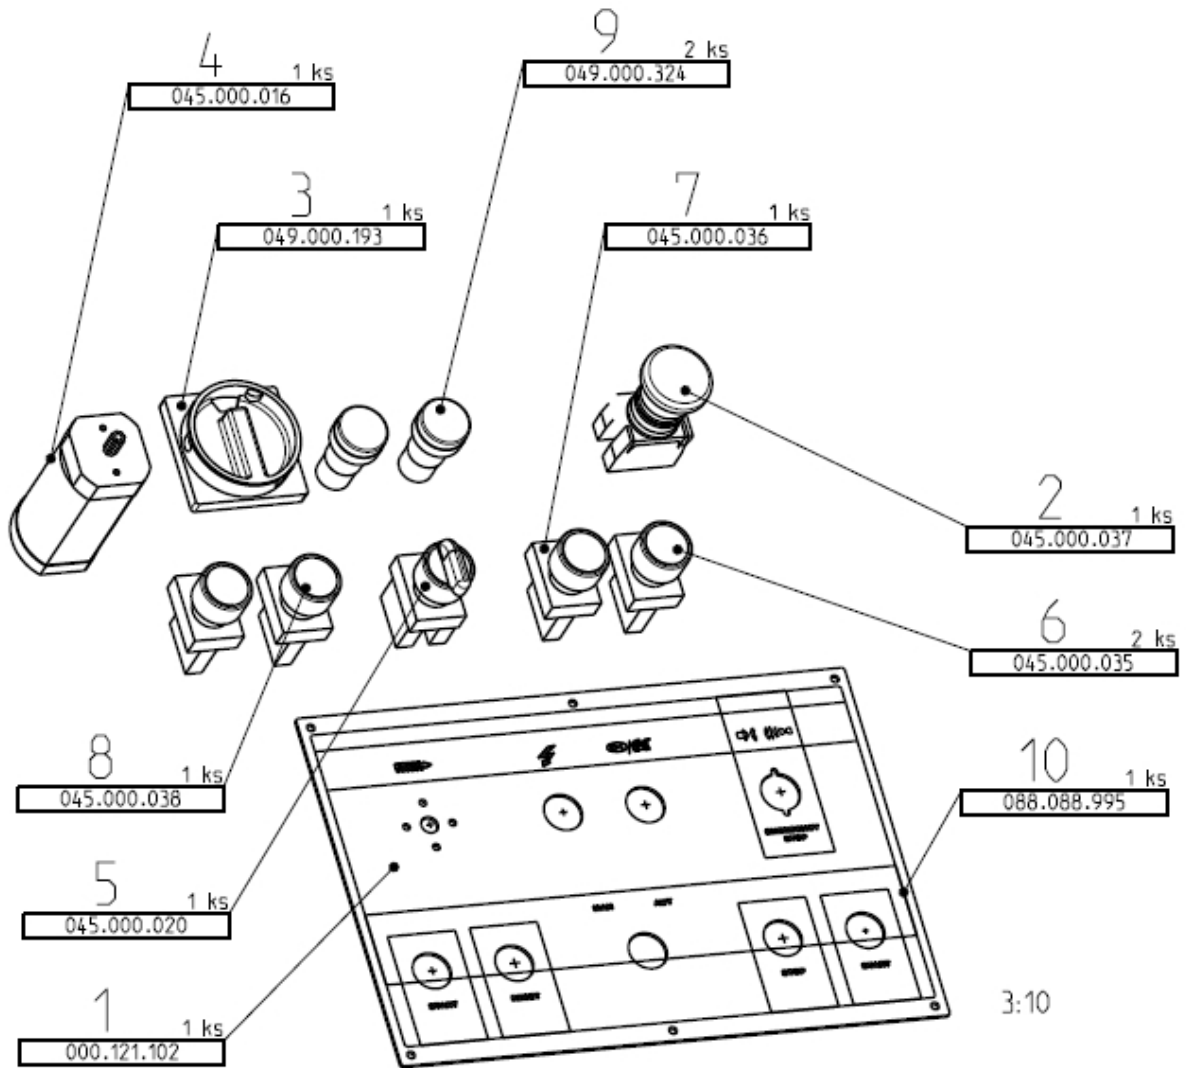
Spare parts drawing / Ersatzteilzeichnung 7
